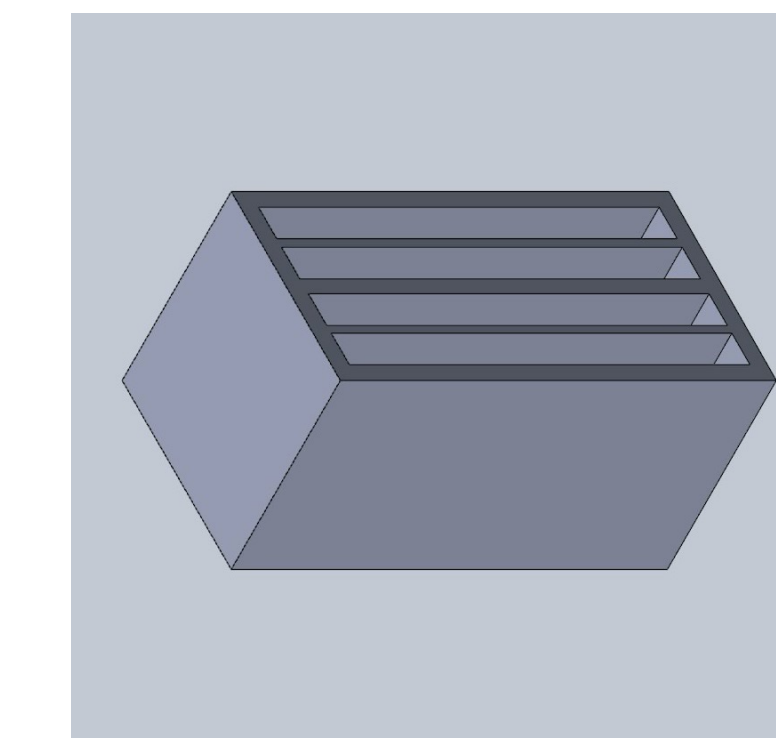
Final Design Crate. Dimensions: 12 cm x 24 cm x 12 cm
